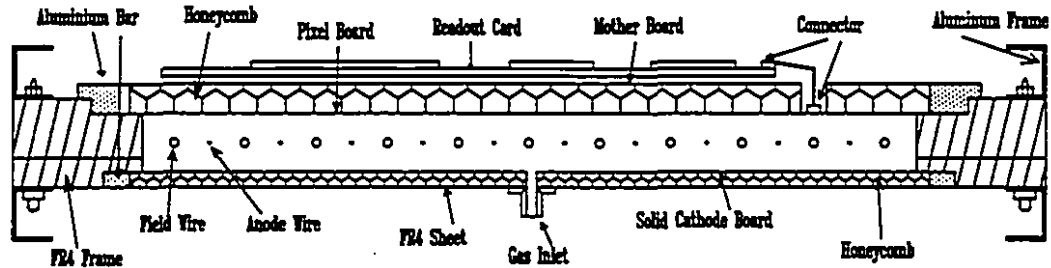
Cross Sectional View of the Mechanical Structure of the Prototype.
